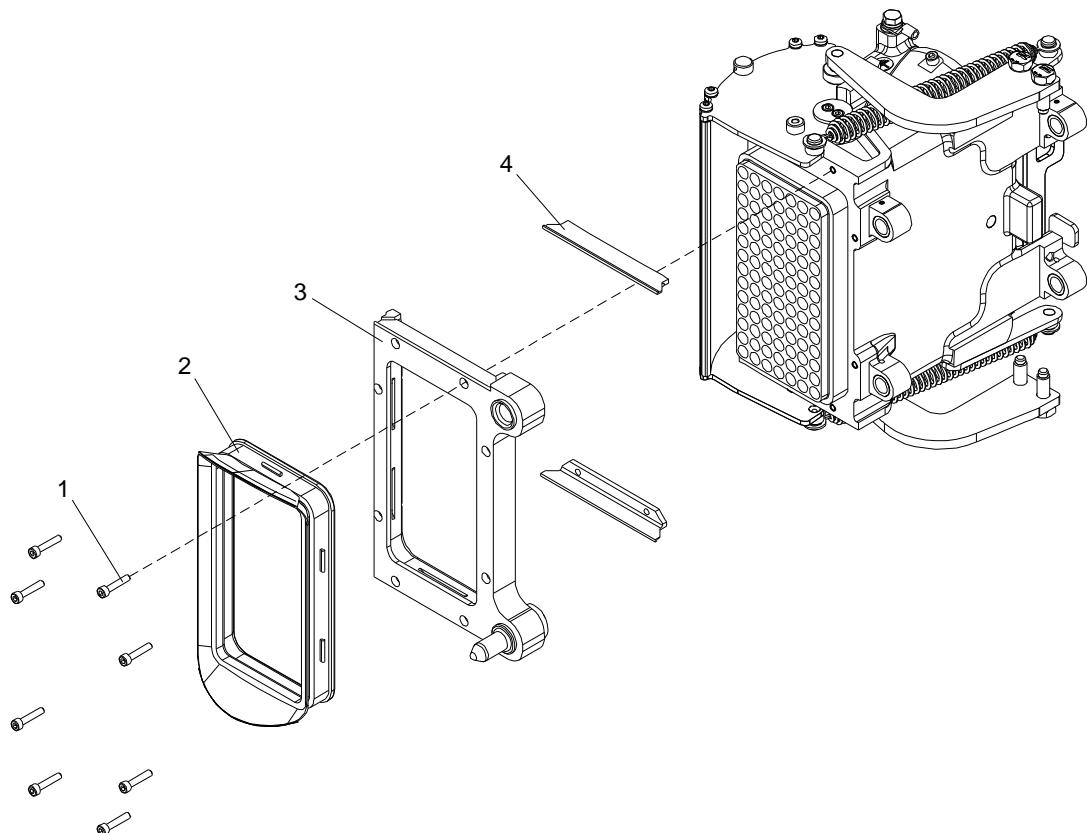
Replacement of Frame Including Guiding Pin and Guide Bushing
